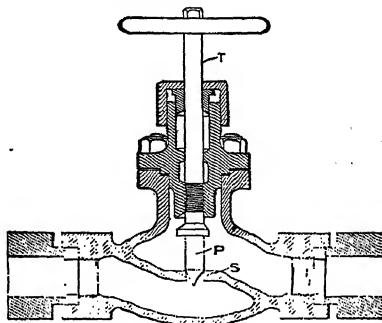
Needle-pointed expansion valve with screwed ends.
